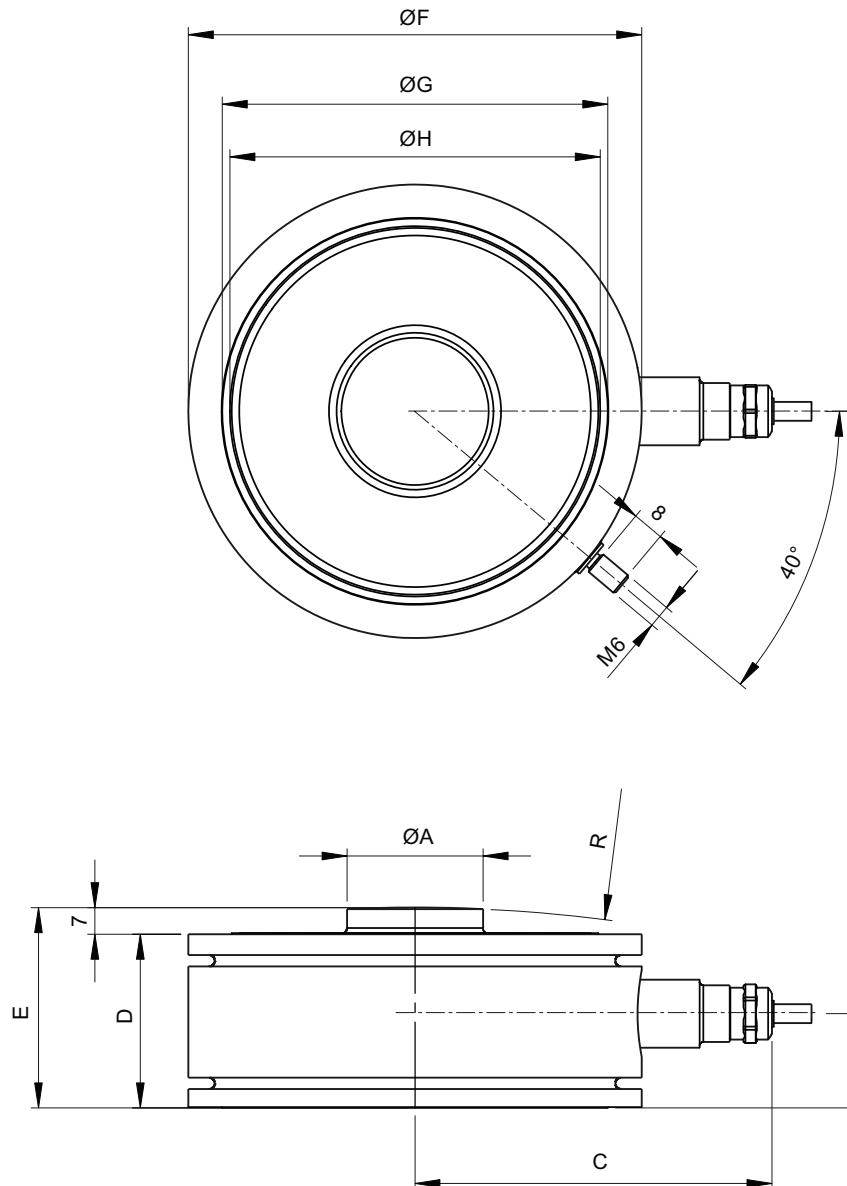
Dimension drawing for SIWAREX WL280 RN-S SA, rated load 28 t and 60 t
